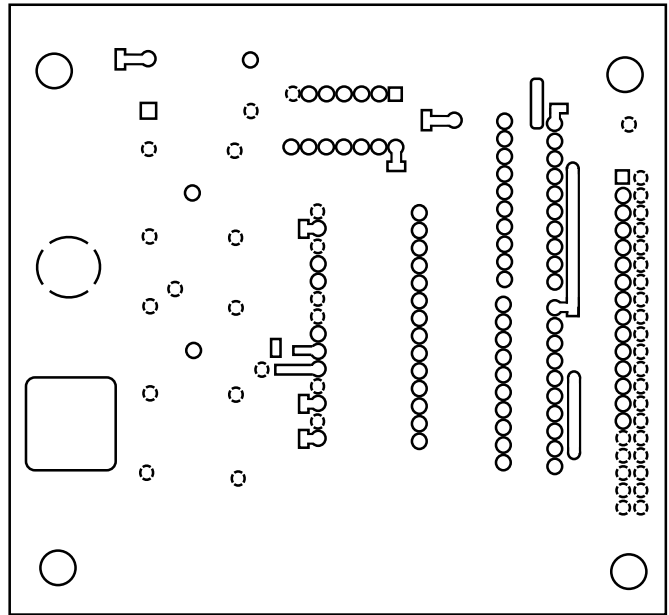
AD9042D/PCB Top Side Copper (Negative)
